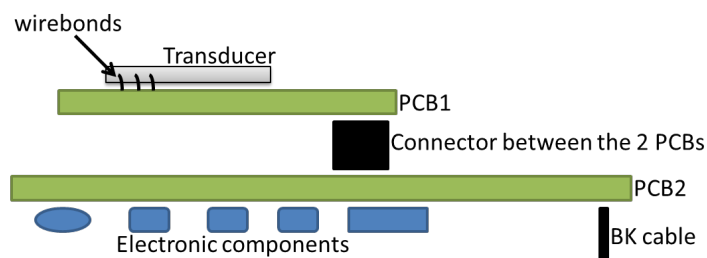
Design of flexible transducer evaluation platform for testing various CMUT designs. The transducer is mounted on a PCB using wirebonding, the PCB is connected to another PCB containing all electronics and a cable for connecting to a scanner is attached to the electronics PCB.
